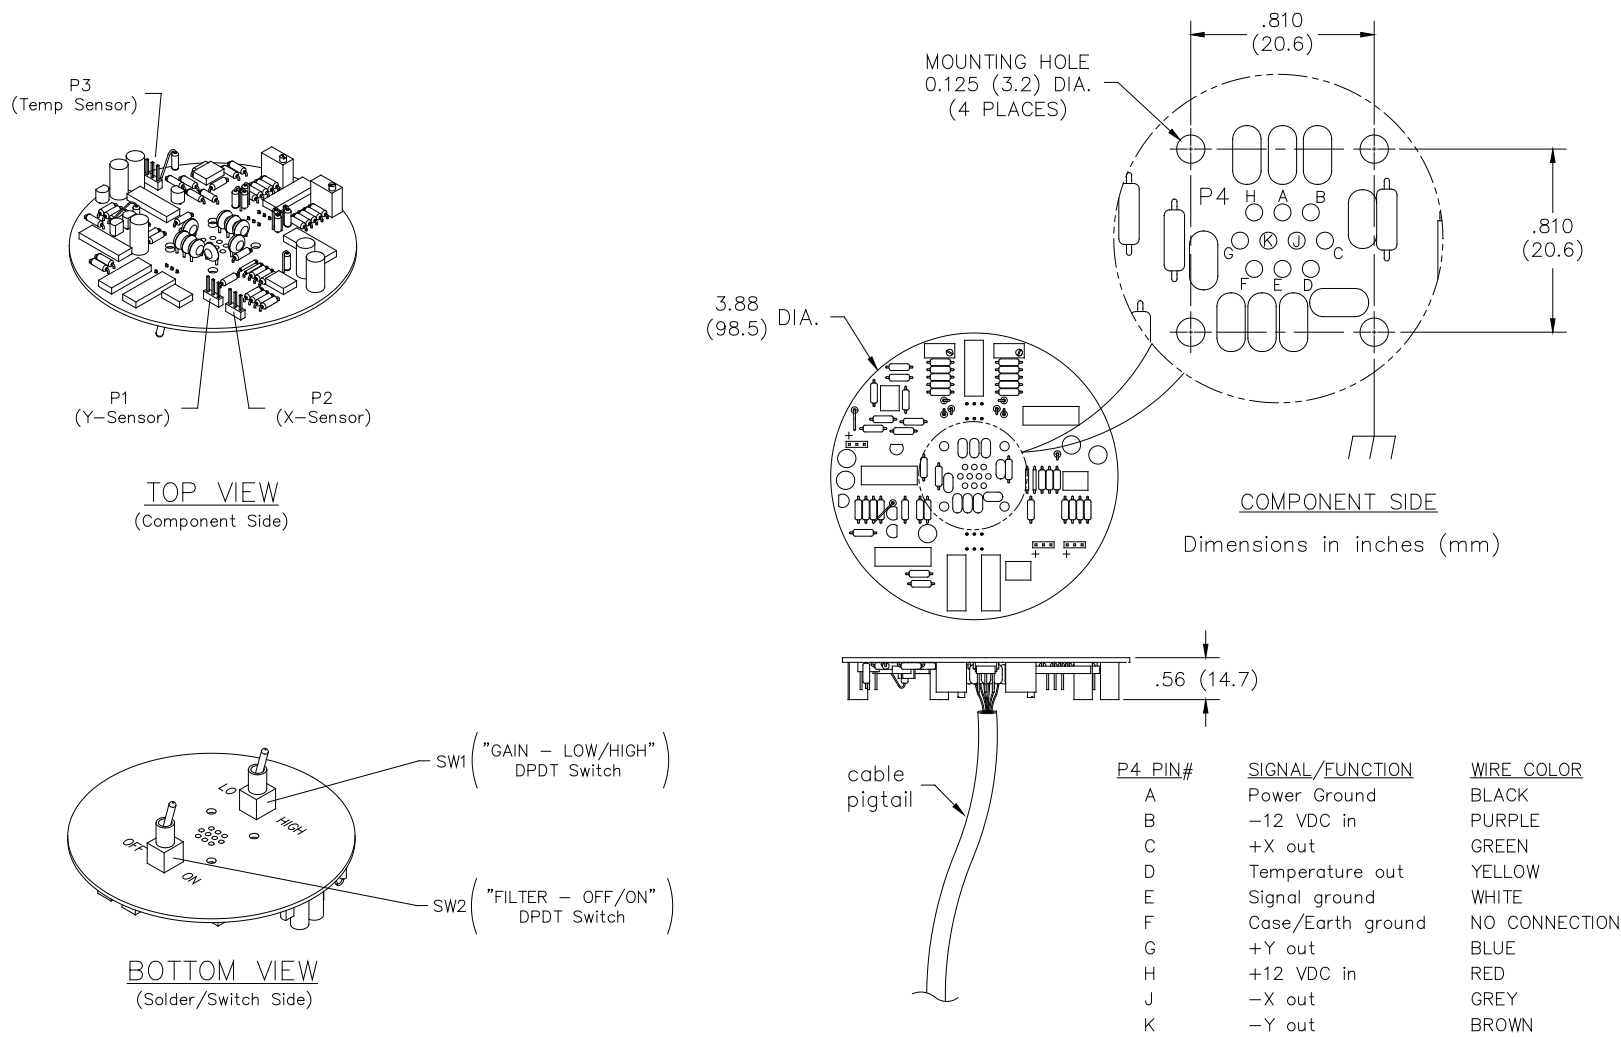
Model 83162 Dimensions and Features; Dimensions in inches (mm)
